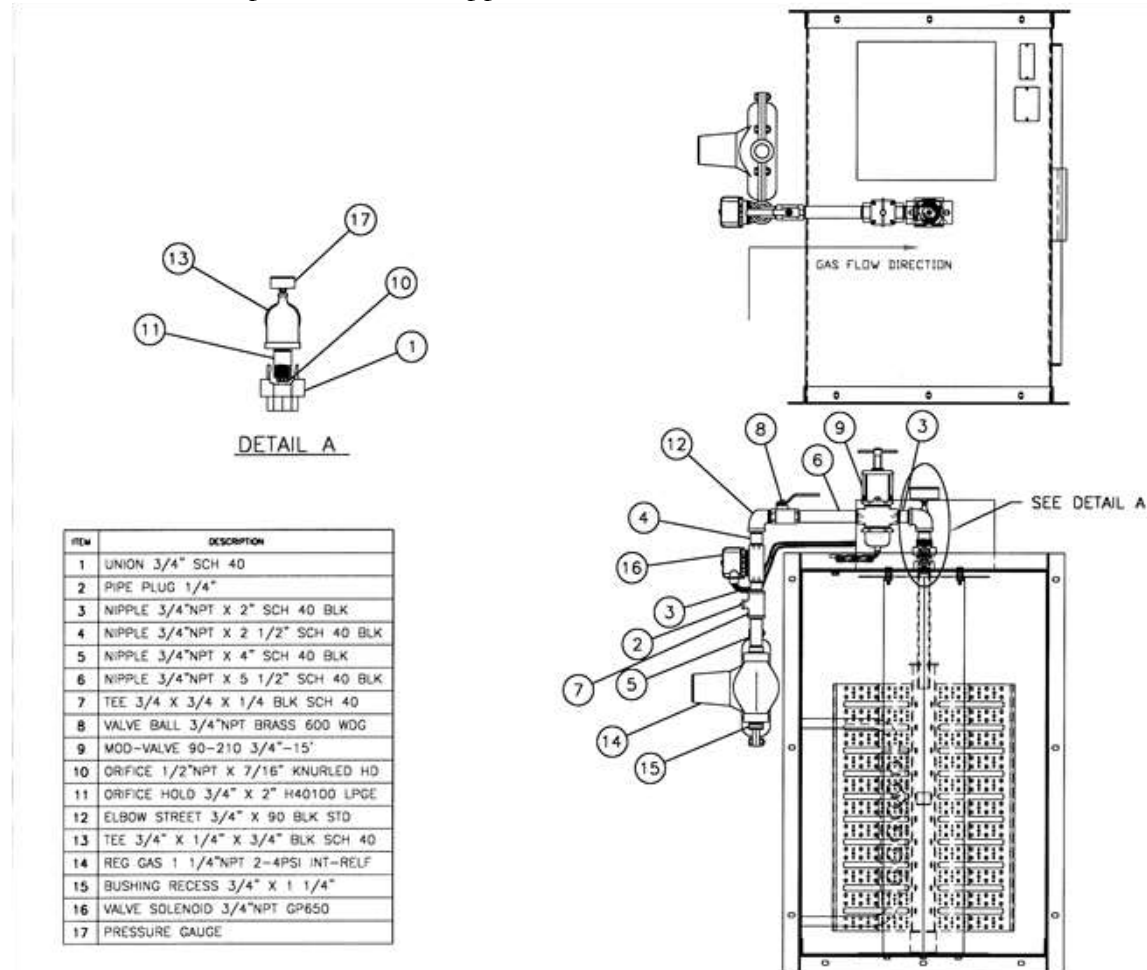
MOD VALVE KIT ASSEMBLY FOR DOWNSTREAM HEATERS (MODEL: CH2025)
